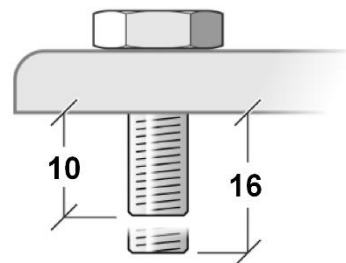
Min./max. bolt protrusion into fixture base (millimeters)
